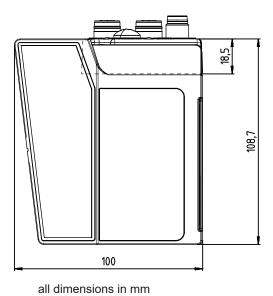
Dimensioned drawing BPS with MS 301 connection hood
